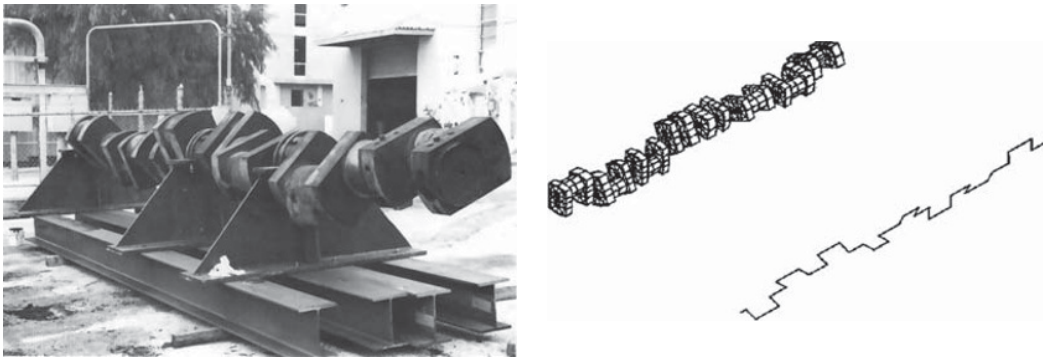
Reciprocating compressor crankshaft and its beam and brick element models
